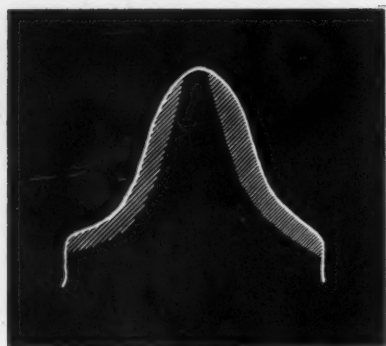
(Left) Depth and Extent of Hardened Surface Produced on Sprocket Tooth Using Single-torch Manual Operation
